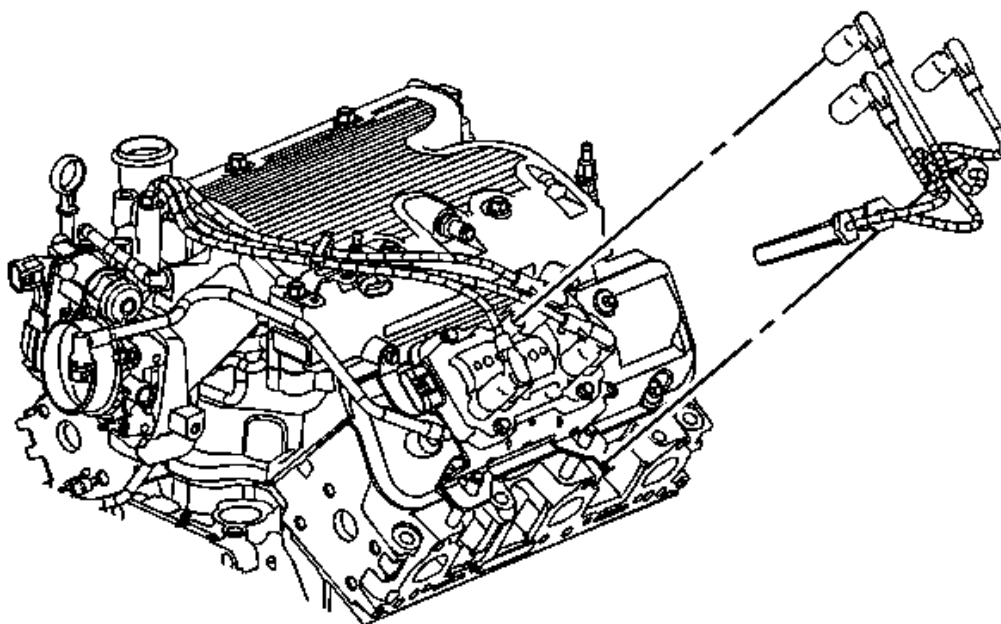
Right Side Spark Plug Wires & Ignition Coil
